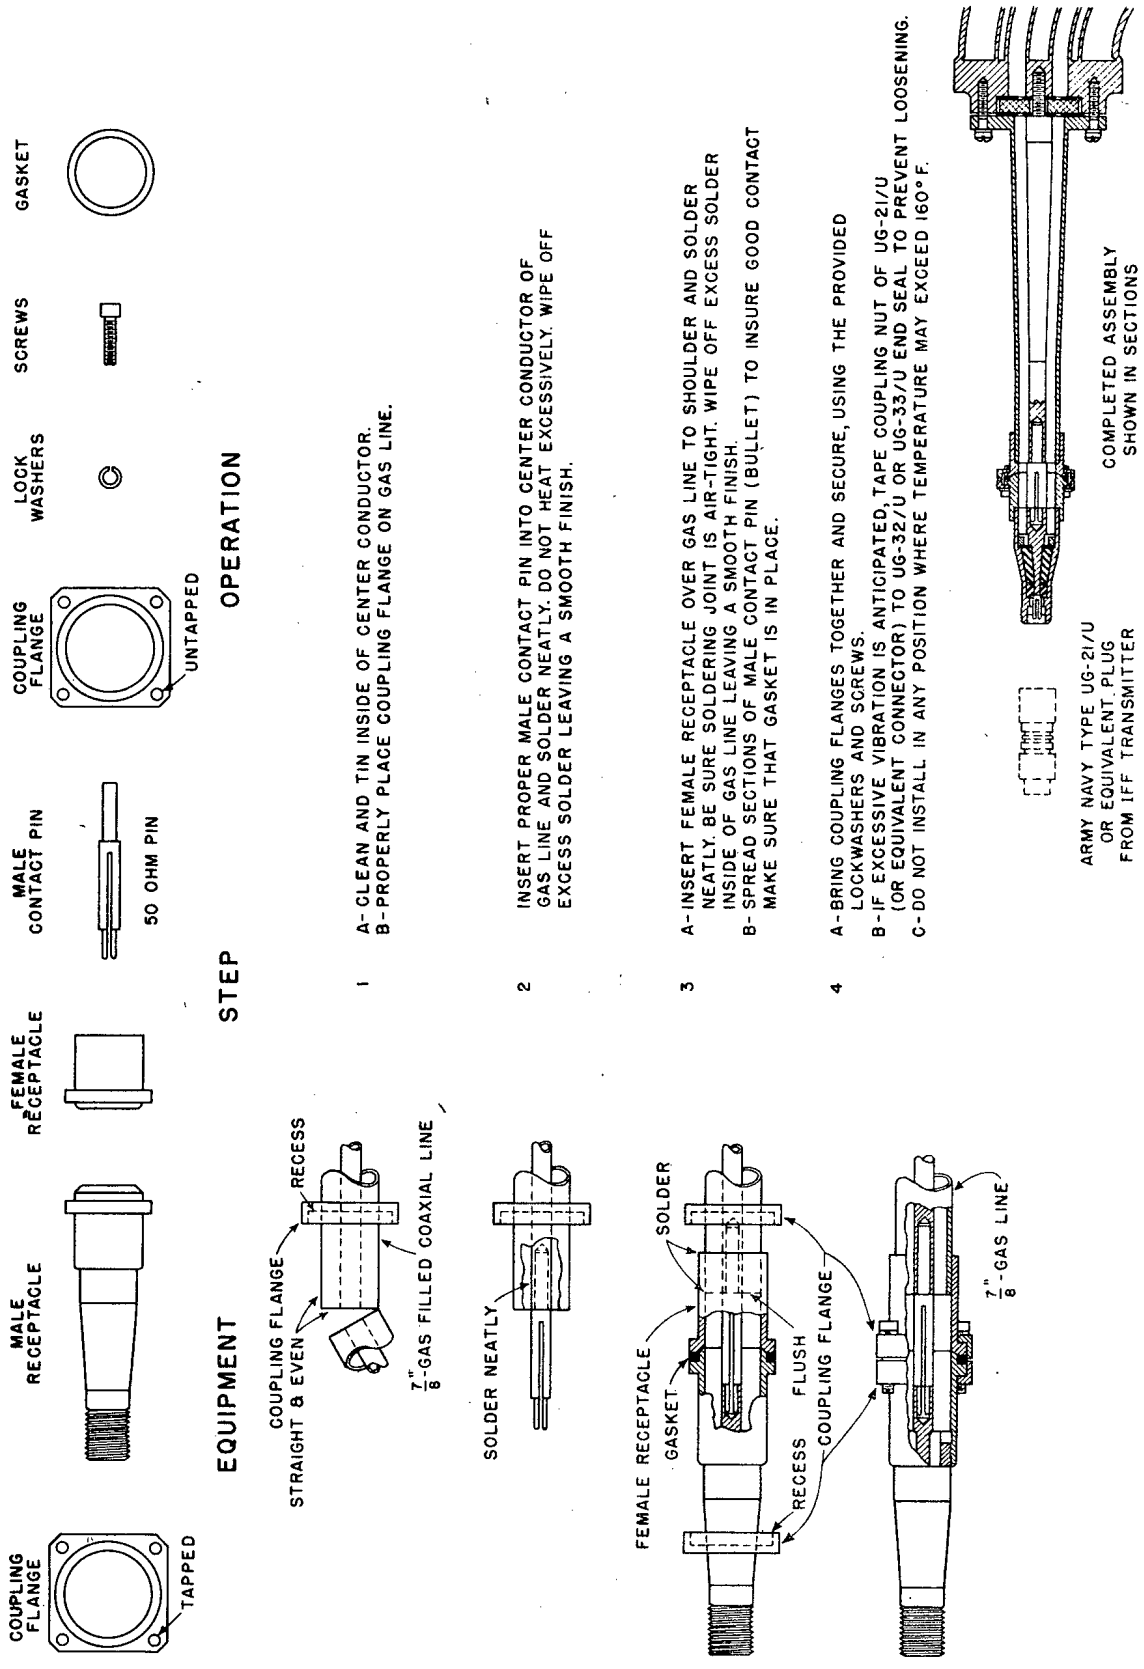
R.F. Connector, Type UG-32/U Assembly to IFF Transmission Line
